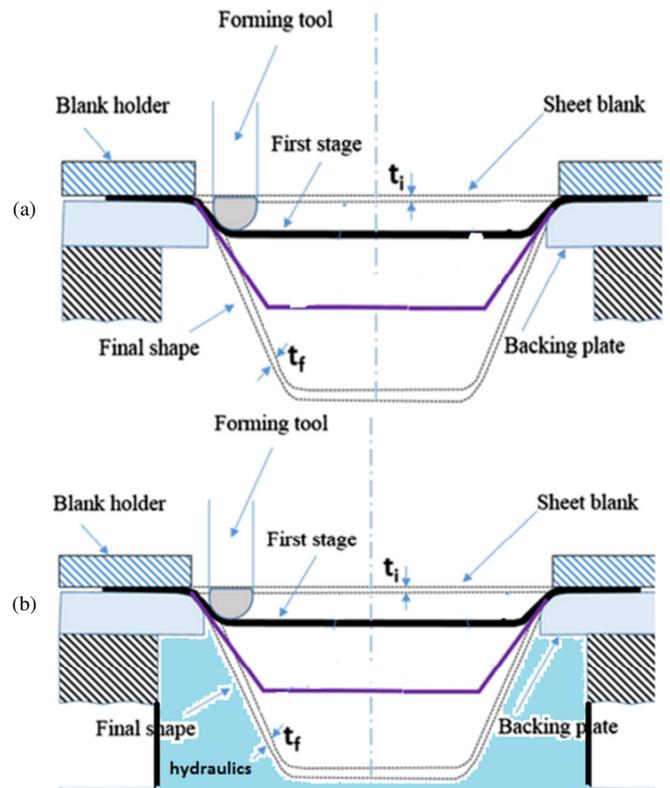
(a) without hydraulics, (b) with hydraulics.
